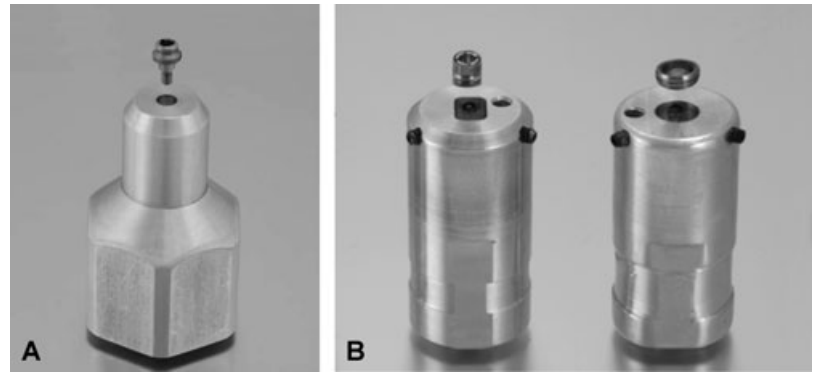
(A) Lower cylindrical fixture mount designed to hold a spherical stud implant abutment. (B) Lower cylindrical fixture mount designed to hold the gold retentive housing for the corresponding spherical stud implant abutment.
